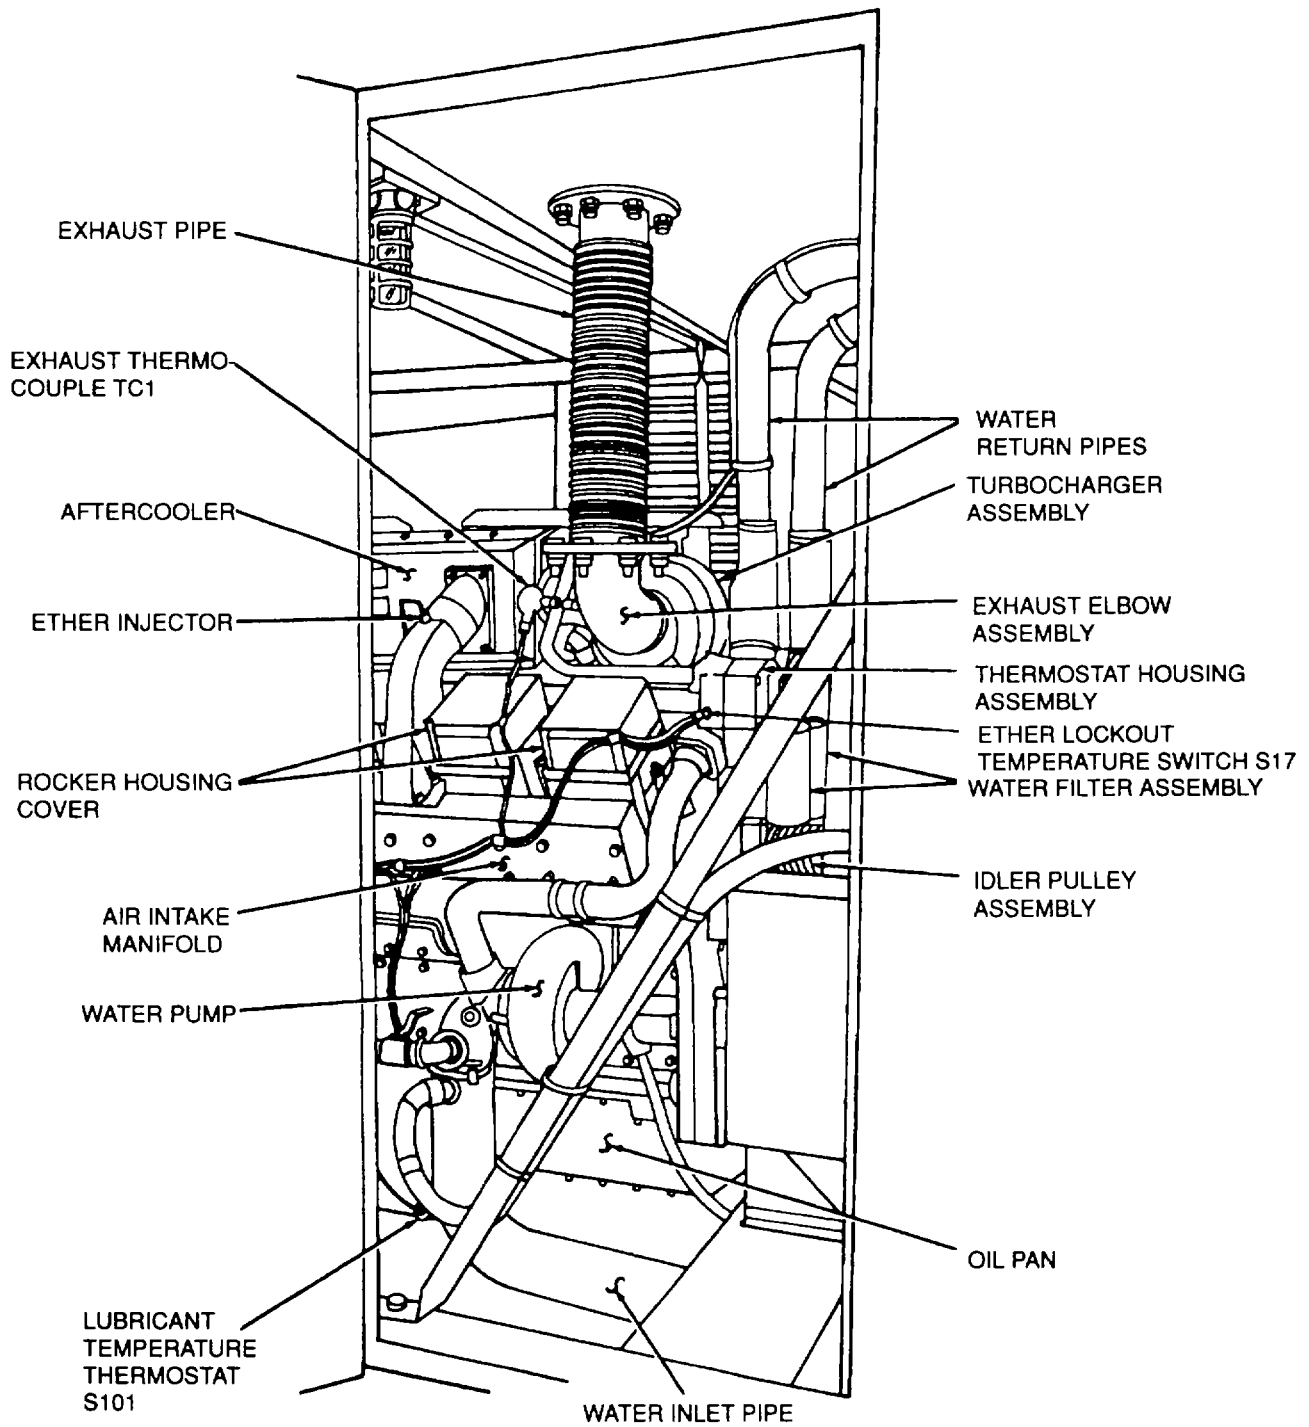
Generator Set - View Into Right Front Side of Engine Compartment
